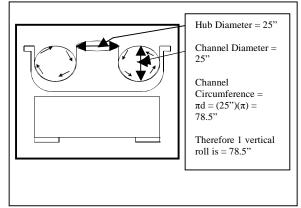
; Cross-sectional view of vibe bowl showing operating channel dimensions.⁵
